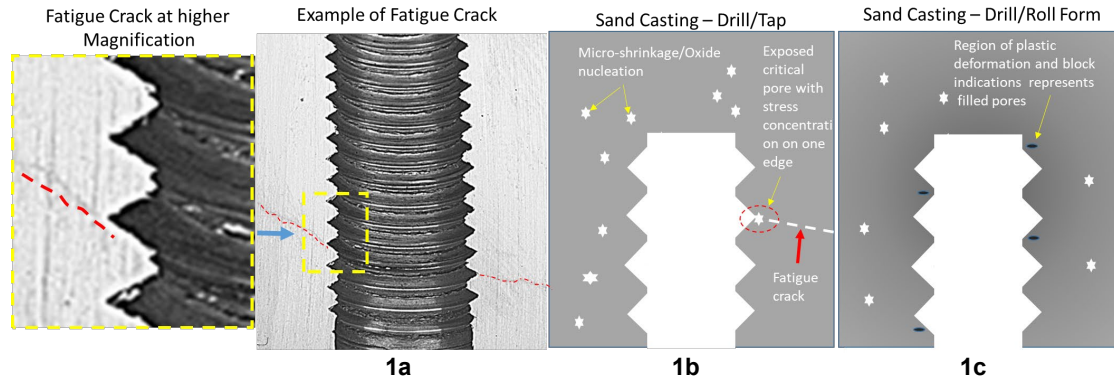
Image of a tapped and cut bolt hole which illustrates a fatigue crack which has nucleated from the trough portion of the thread profile. 1b) a schematic thread profile where a pore located at the thread trough, 1c) with roll-forming illustrating how pores opened by the initial hole cut are plastically deformed and closed.¹
